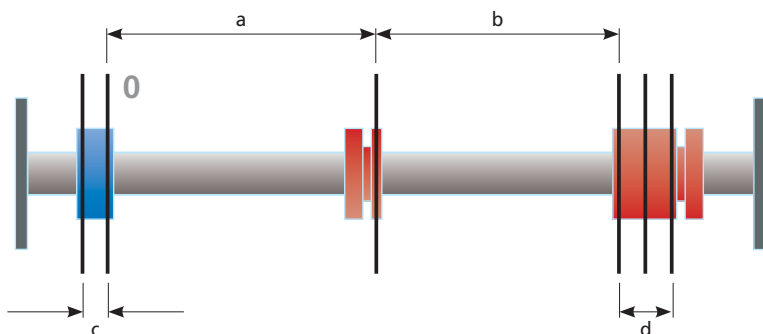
Movable saw configuration with one fixed and two movable saw bushes
